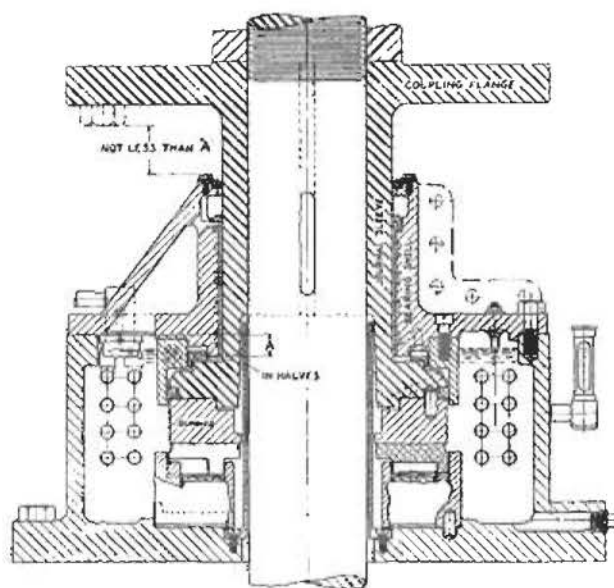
Combined thrust and radial bearing with automatic journal lubrication. Water cooling permits high speed. STANDARDIZED.
